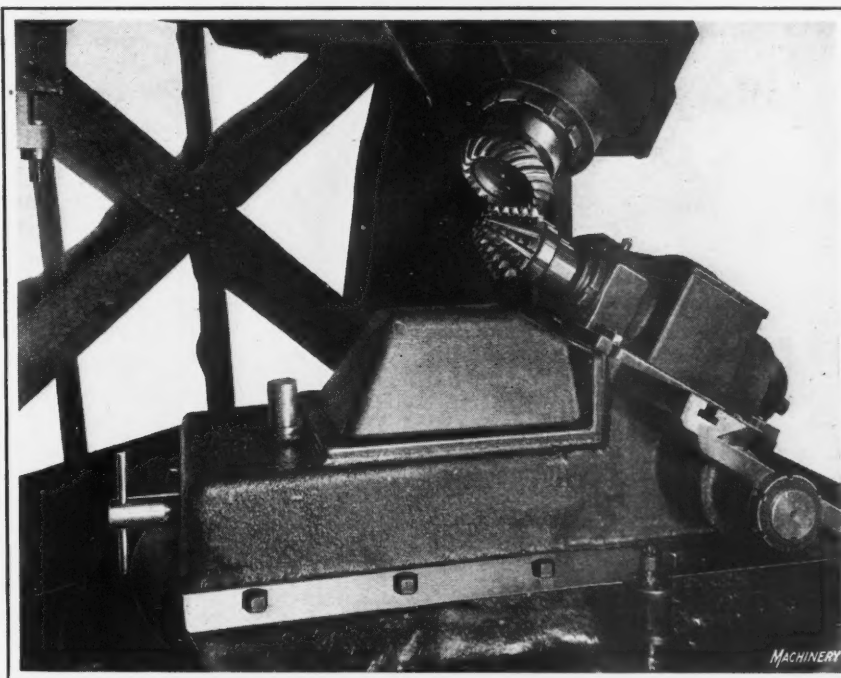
Detailed View of Hobbing Operation, showing a Right-hand Hob cutting a Right-hand Spiral Bevel Miter Gear
